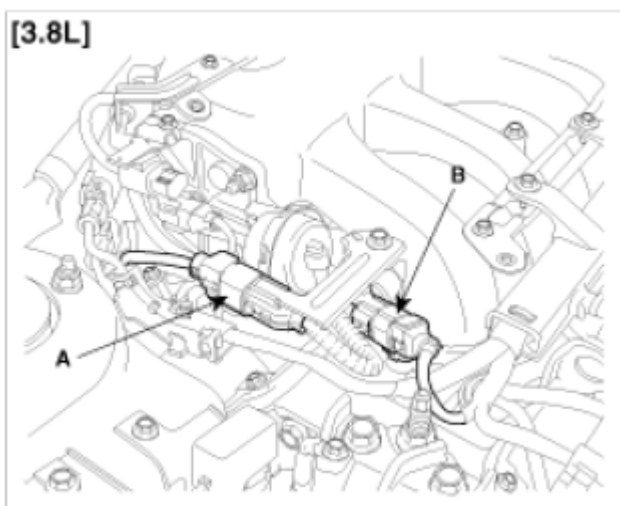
Identifying Power Steering Oil Pressure Sensor Connector
